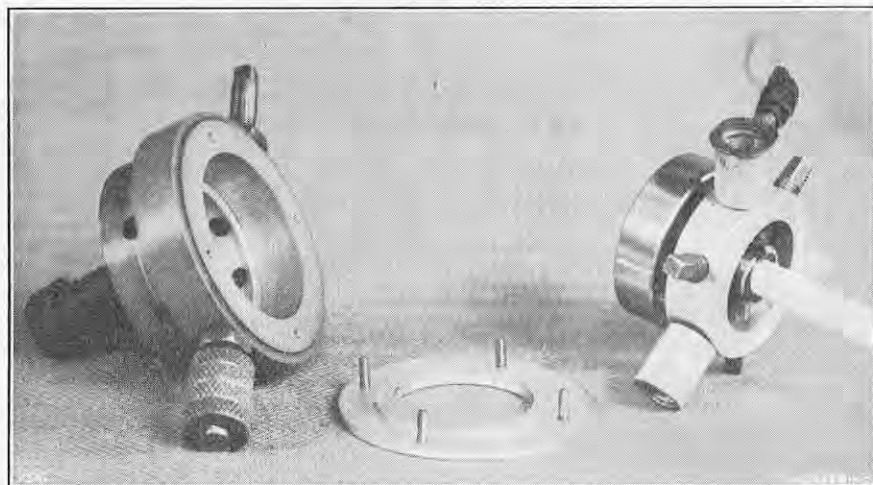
COMPONENTS OF LOADING ASSEMBLY.
